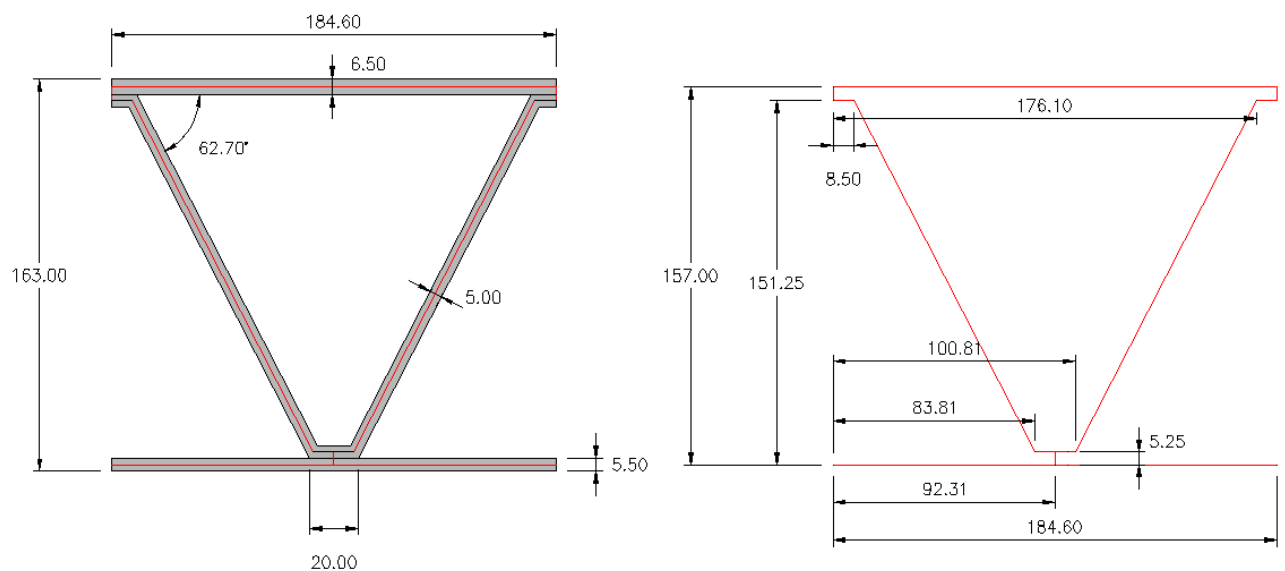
a) Cross-section of panel A1, B1 and C1 b) How the cross-section is modelled in ABAQUS.
